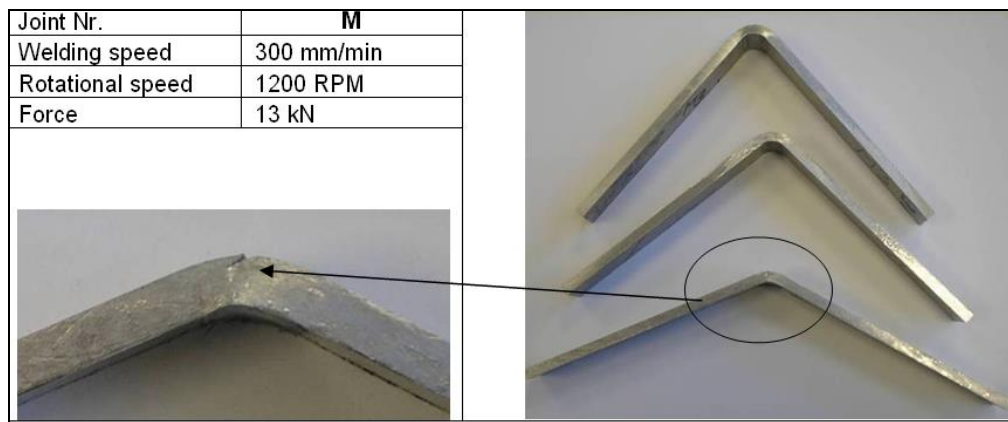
18. Bending specimens for 6082-T651 joint root (up) and joint surface (down). Surface rupture
